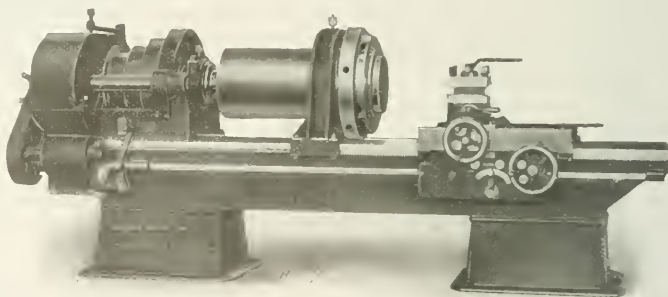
American Machine Tool Co.'s 24-inch Shell Lathe equipped with Steadyrest and Chuck
